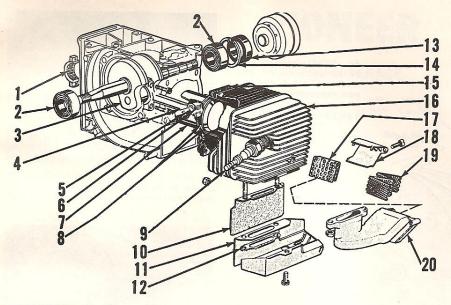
View of engine crankshaft, connecting rod and associated parts. Magneto end crankcase seal and bearing housing is shown in Fig. PR1-7.
